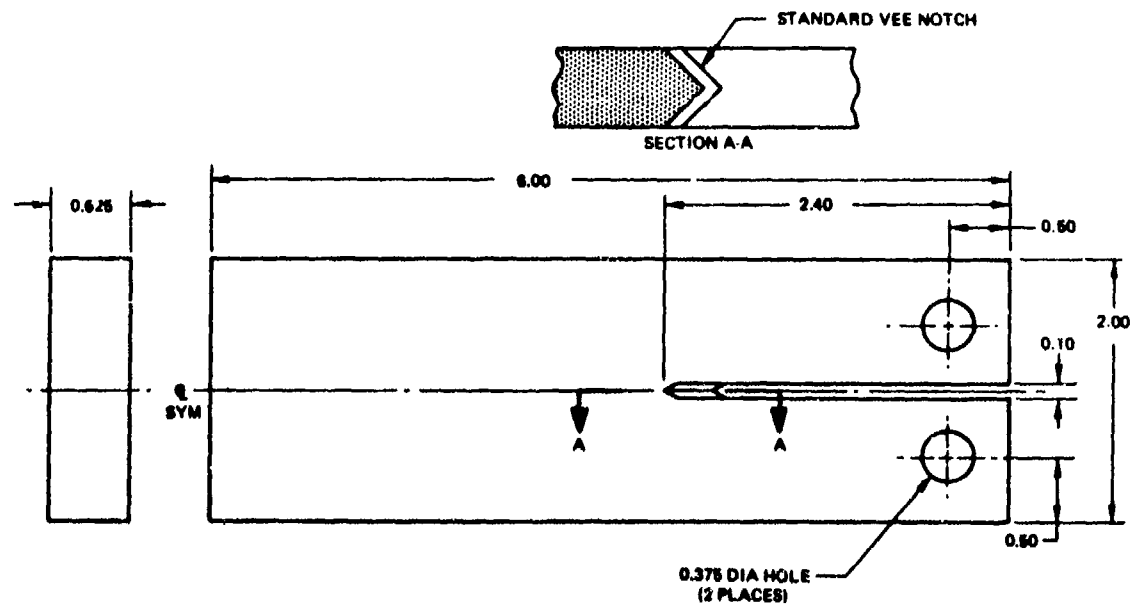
DCB Specimen Configuration Used For Stress Corrosion Testing
